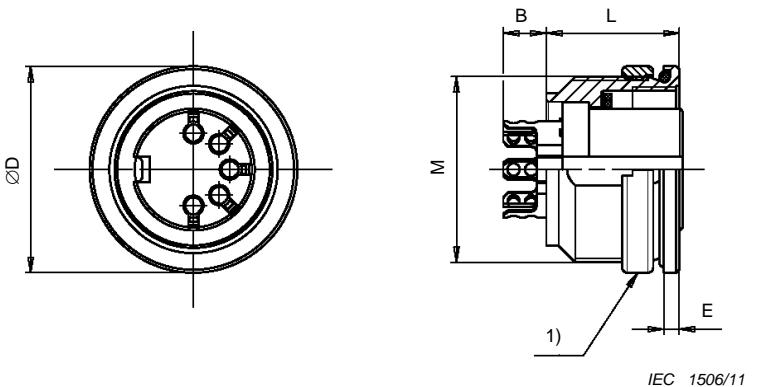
Fixed connector, female contacts, IP40, rear mounting
